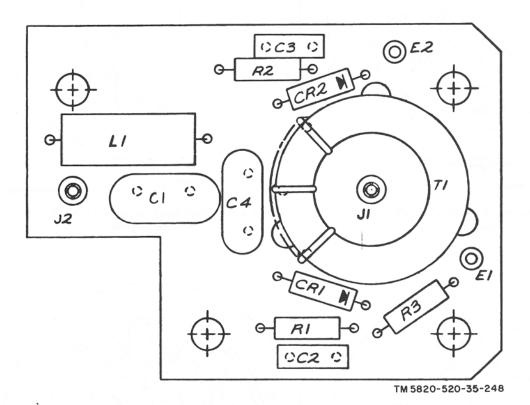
Printed circuit board 2A4A1, parts location diagram.
